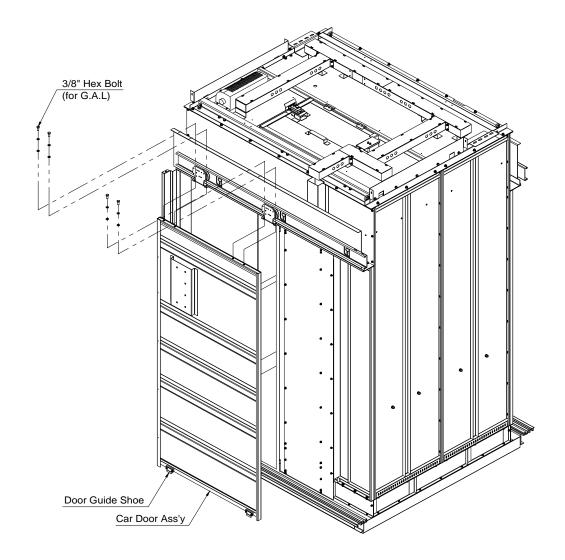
B. INSTALLATION OF CAR DOOR (FRONT and REAR ENTRANCE)
